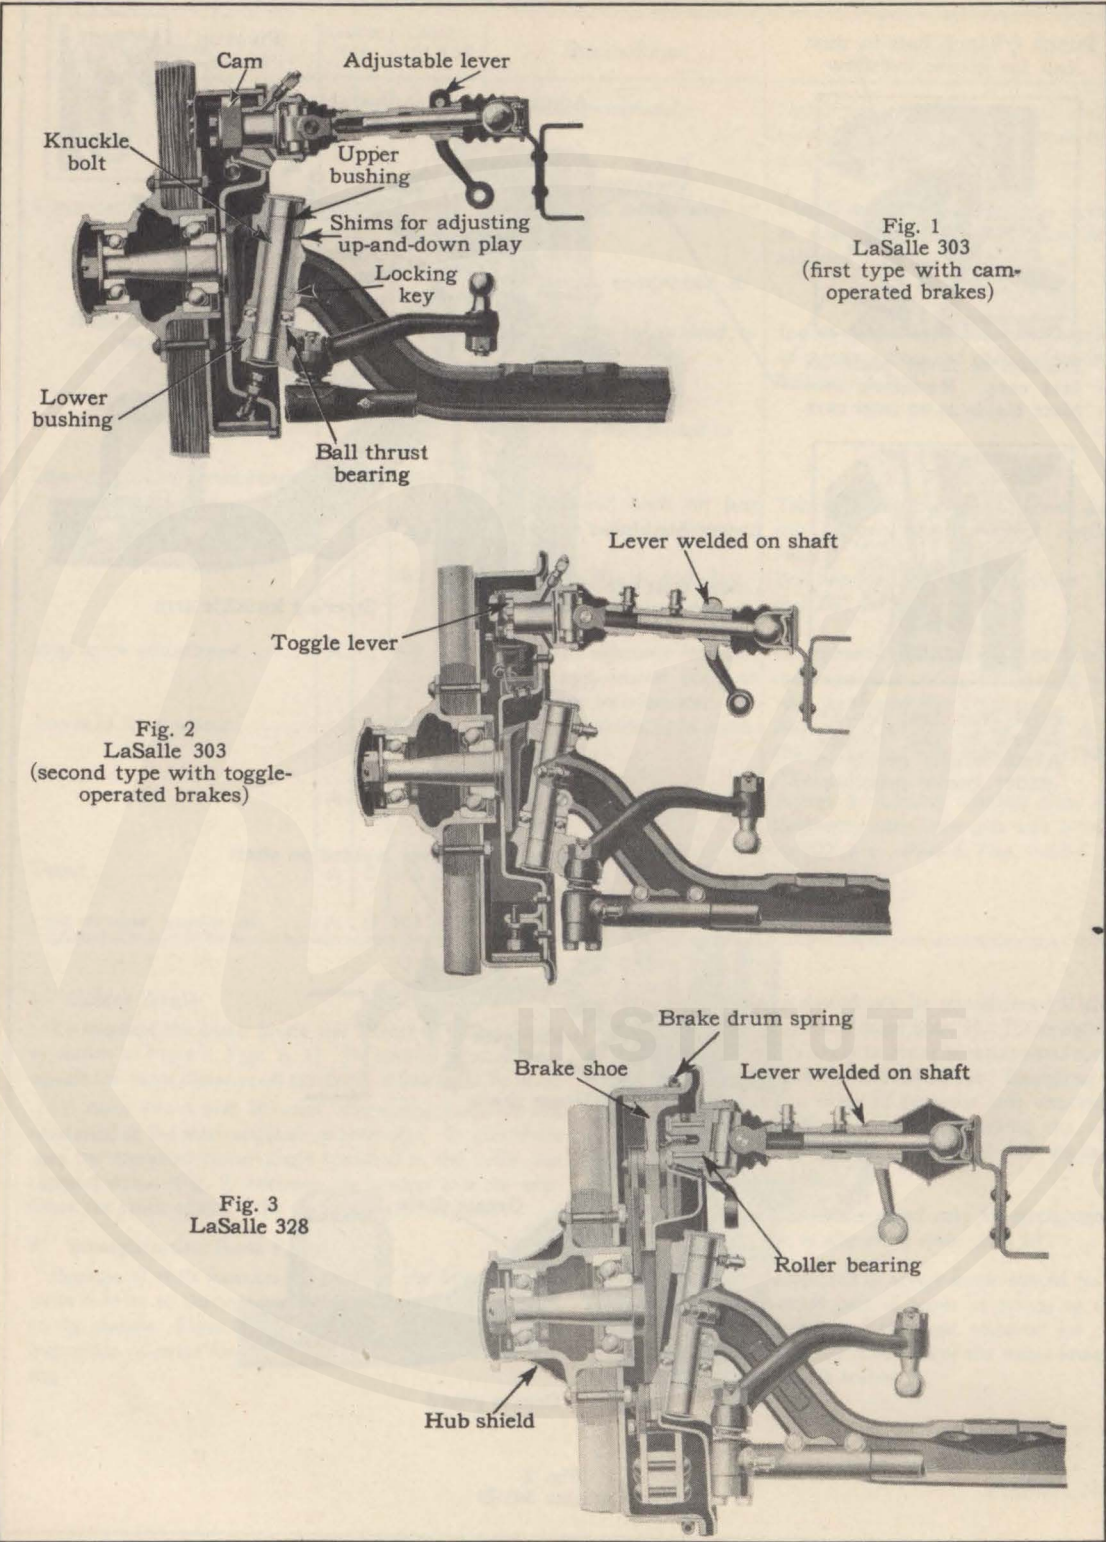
Sectional view of La Salle front wheel hub and steering knuckle.
